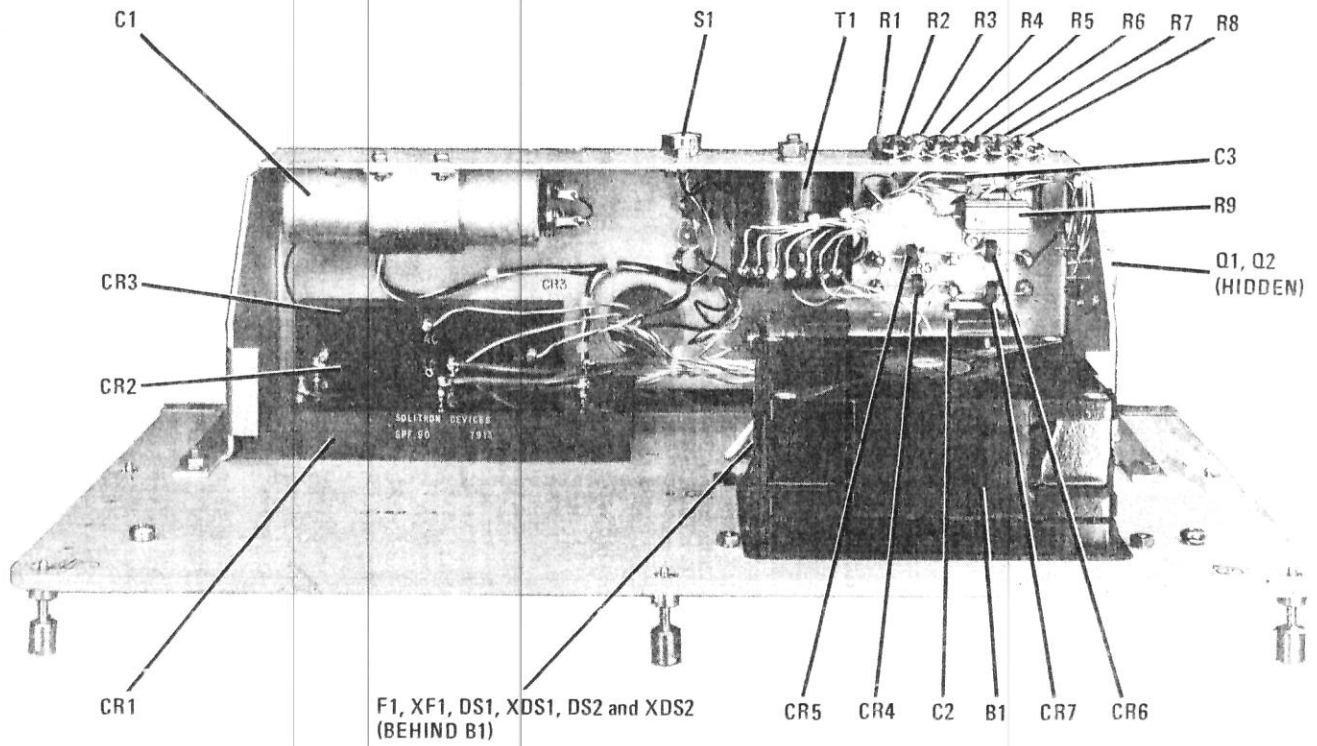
Front Panel Assembly, Component Locations (Units with SN-0650 or Over)
